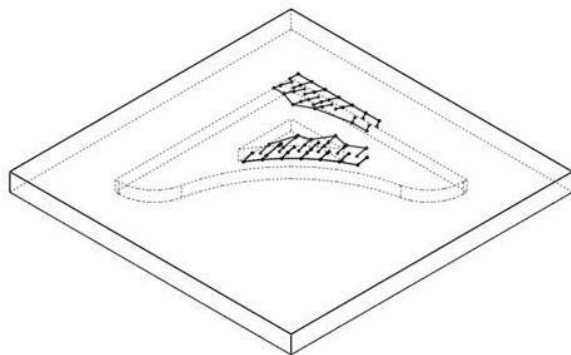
Mold half with a bracket-shaped cavity and printed electrodes
